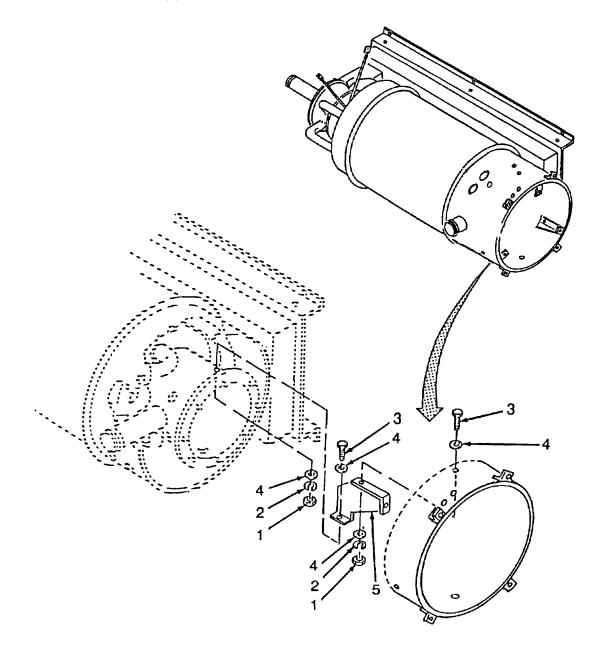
Heat Exchanger, (Model H120-1) Disassembly
